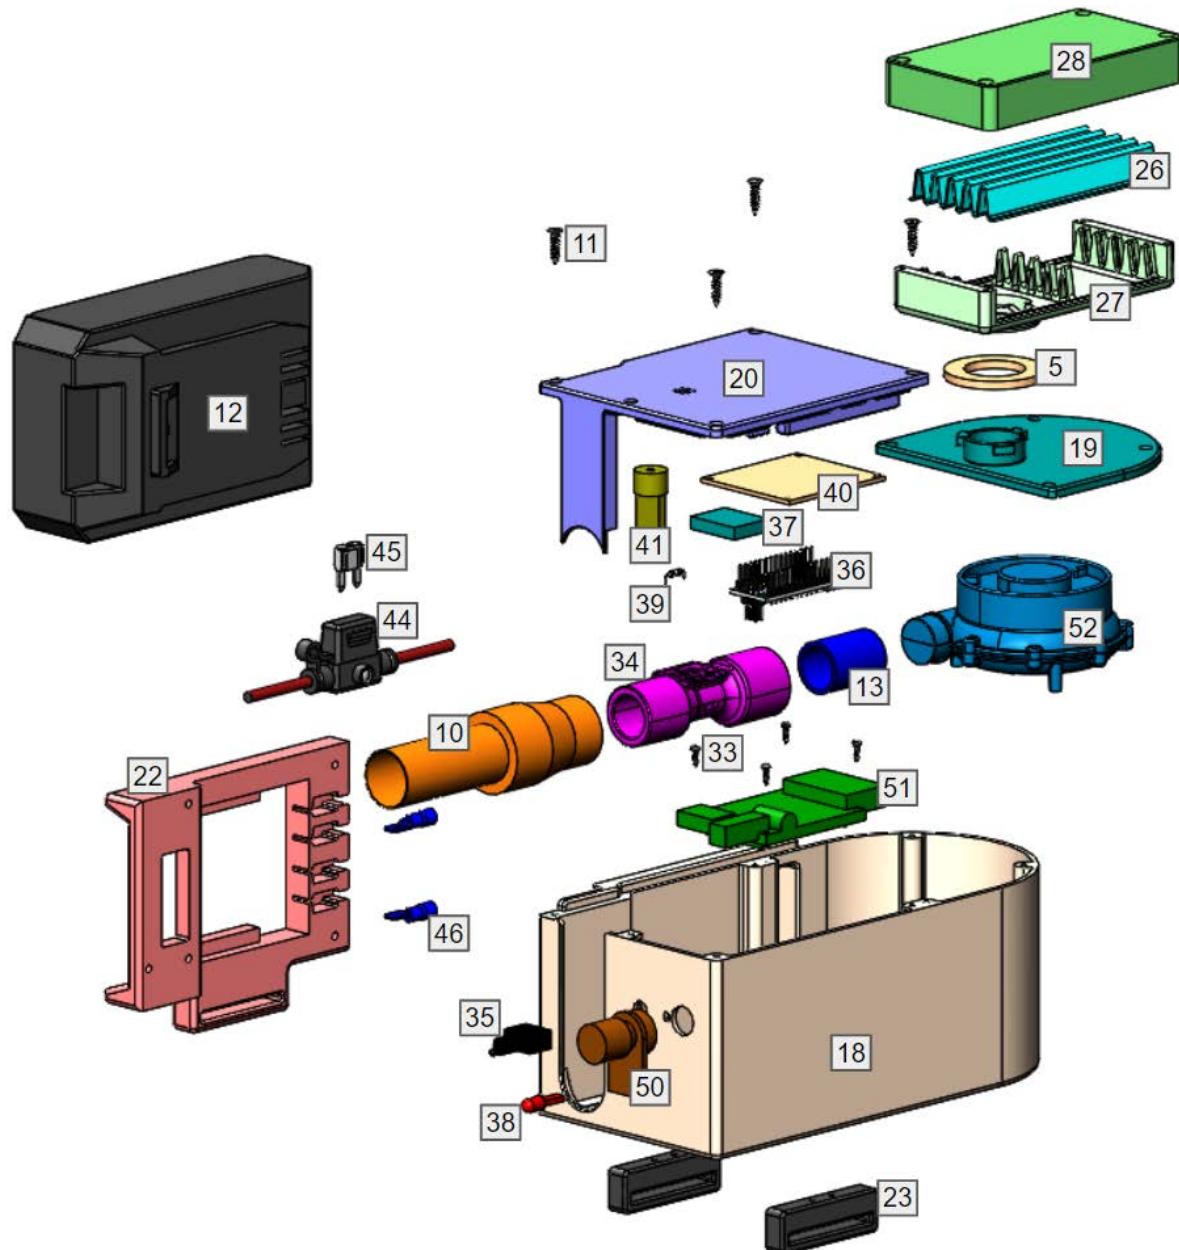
Globe Tools blower assembly exploded view, with Item Number labeling.
